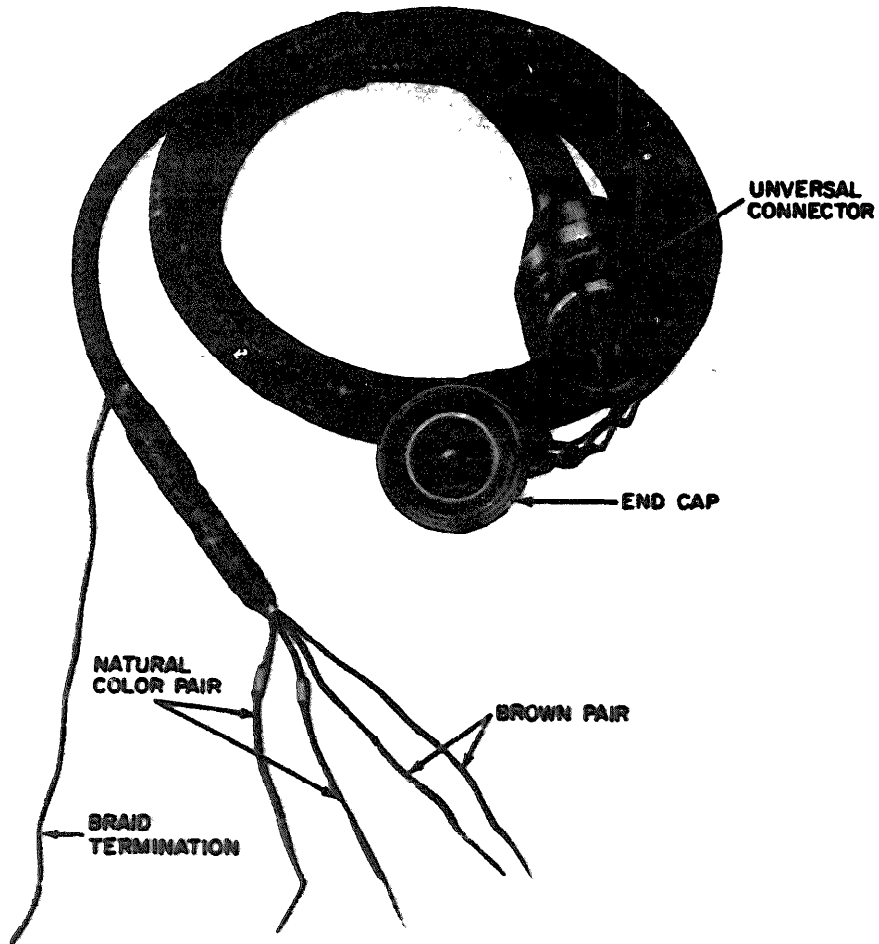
Telephone Cable Assembly -1512/U (spirel-four cable stub).
